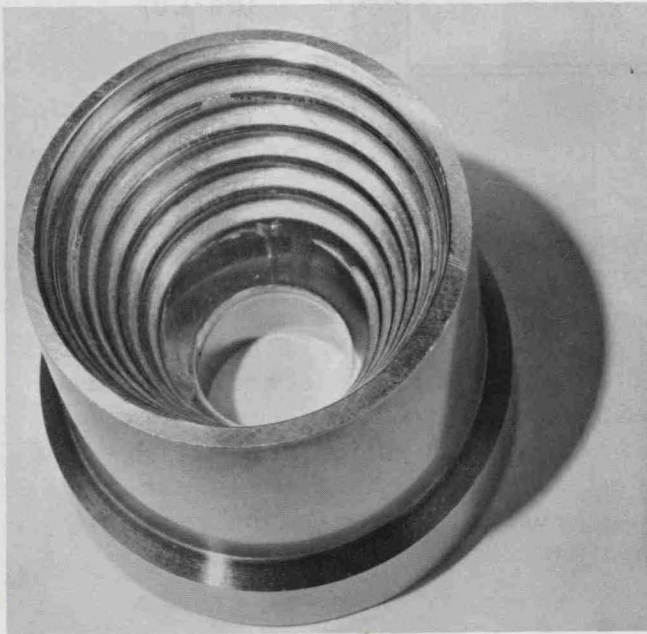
DIE DESIGN WITH HELICAL GROOVE IN CONICAL-ENTRY SURFACE
